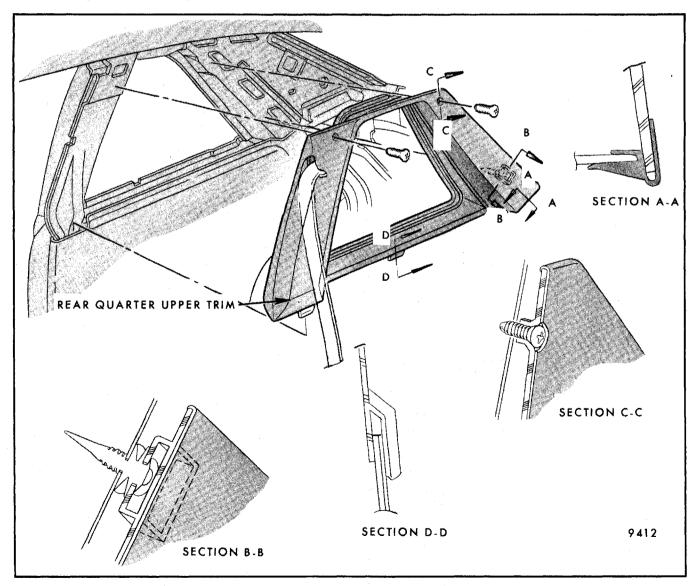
Quarter Upper Trim Attachment - C Style Shown
